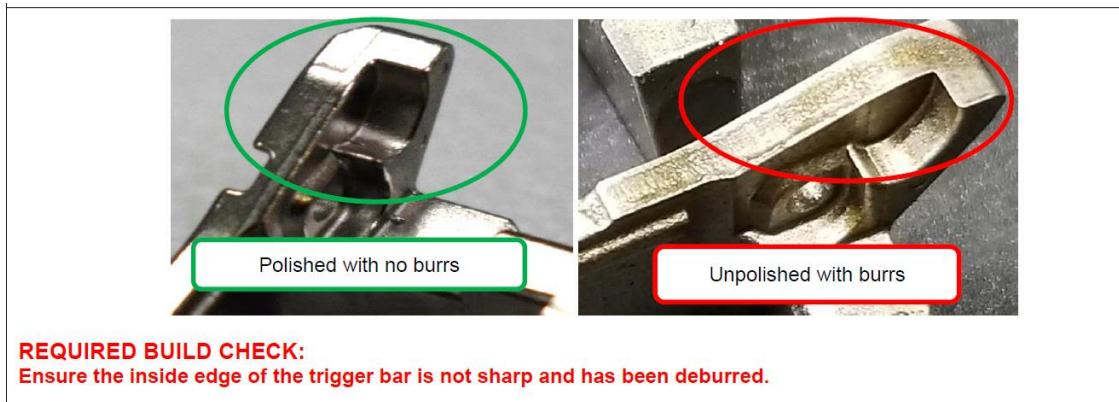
Image from Sig Sauer P320 Assembly and Quality Inspection Master
